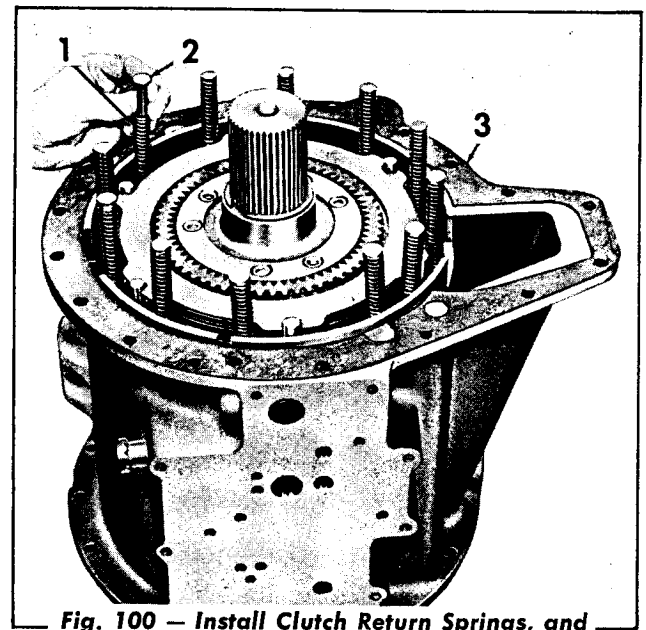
Install Clutch Return Springs, and High and Low Range Clutch Anchor
